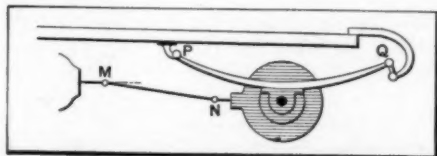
The springs in this example are used as thrust and torque members as the front ends are not shackled and two universal joints are used. These permit one side of the axle to recede without affecting the alignment. This type is referred to as B-2
